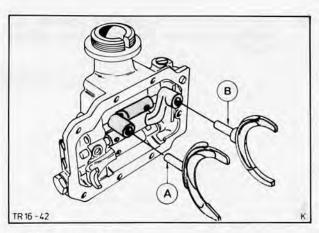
Fit selector forks A - 1st/2nd gear fork B - 3rd/4th gear fork
